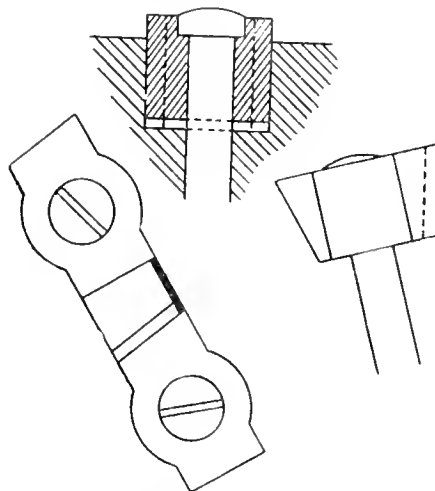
THE MOST RECENT TYPE OF FRANCIS CUTTER
